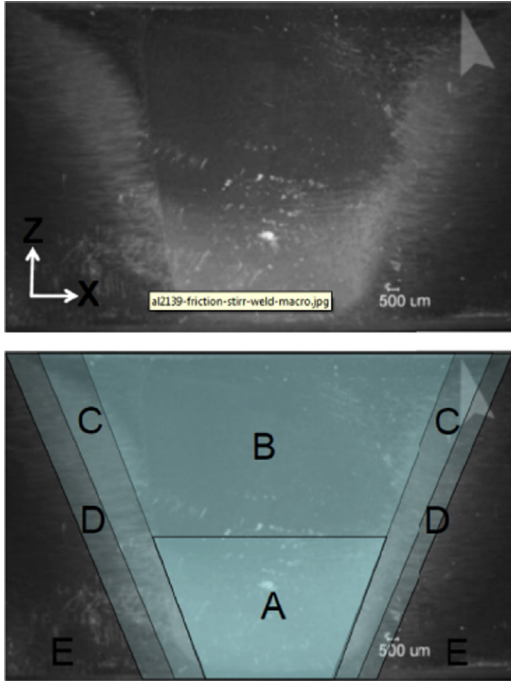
FSW cross section for 2139 Aluminum. The labeled areas correspond to different weld zones which have distinct microstructural and mechanical properties. Zone A is the lower weld nugget, B the upper weld nugget, C the thermo-mechanical affected zone, and D the thermal affected zone.
